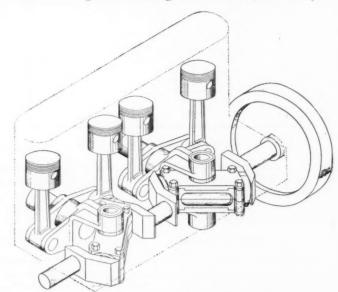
Isometric View of Synchro-Balance Driving Gear Applied to a 4-Cylinder Vertical Engine
